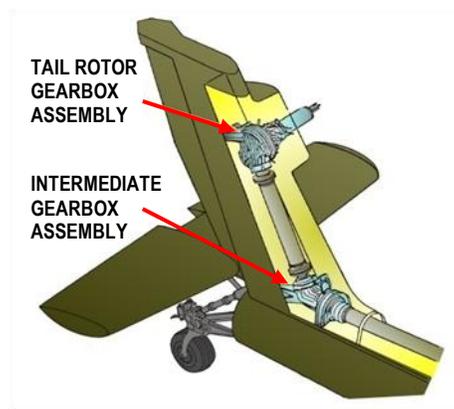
AH-64 tail rotor and intermediate gearbox assembly location
